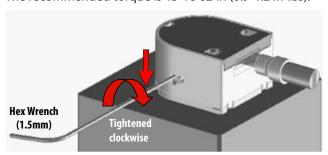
Tightening encoder body unit set-screw to the motor's shaft
